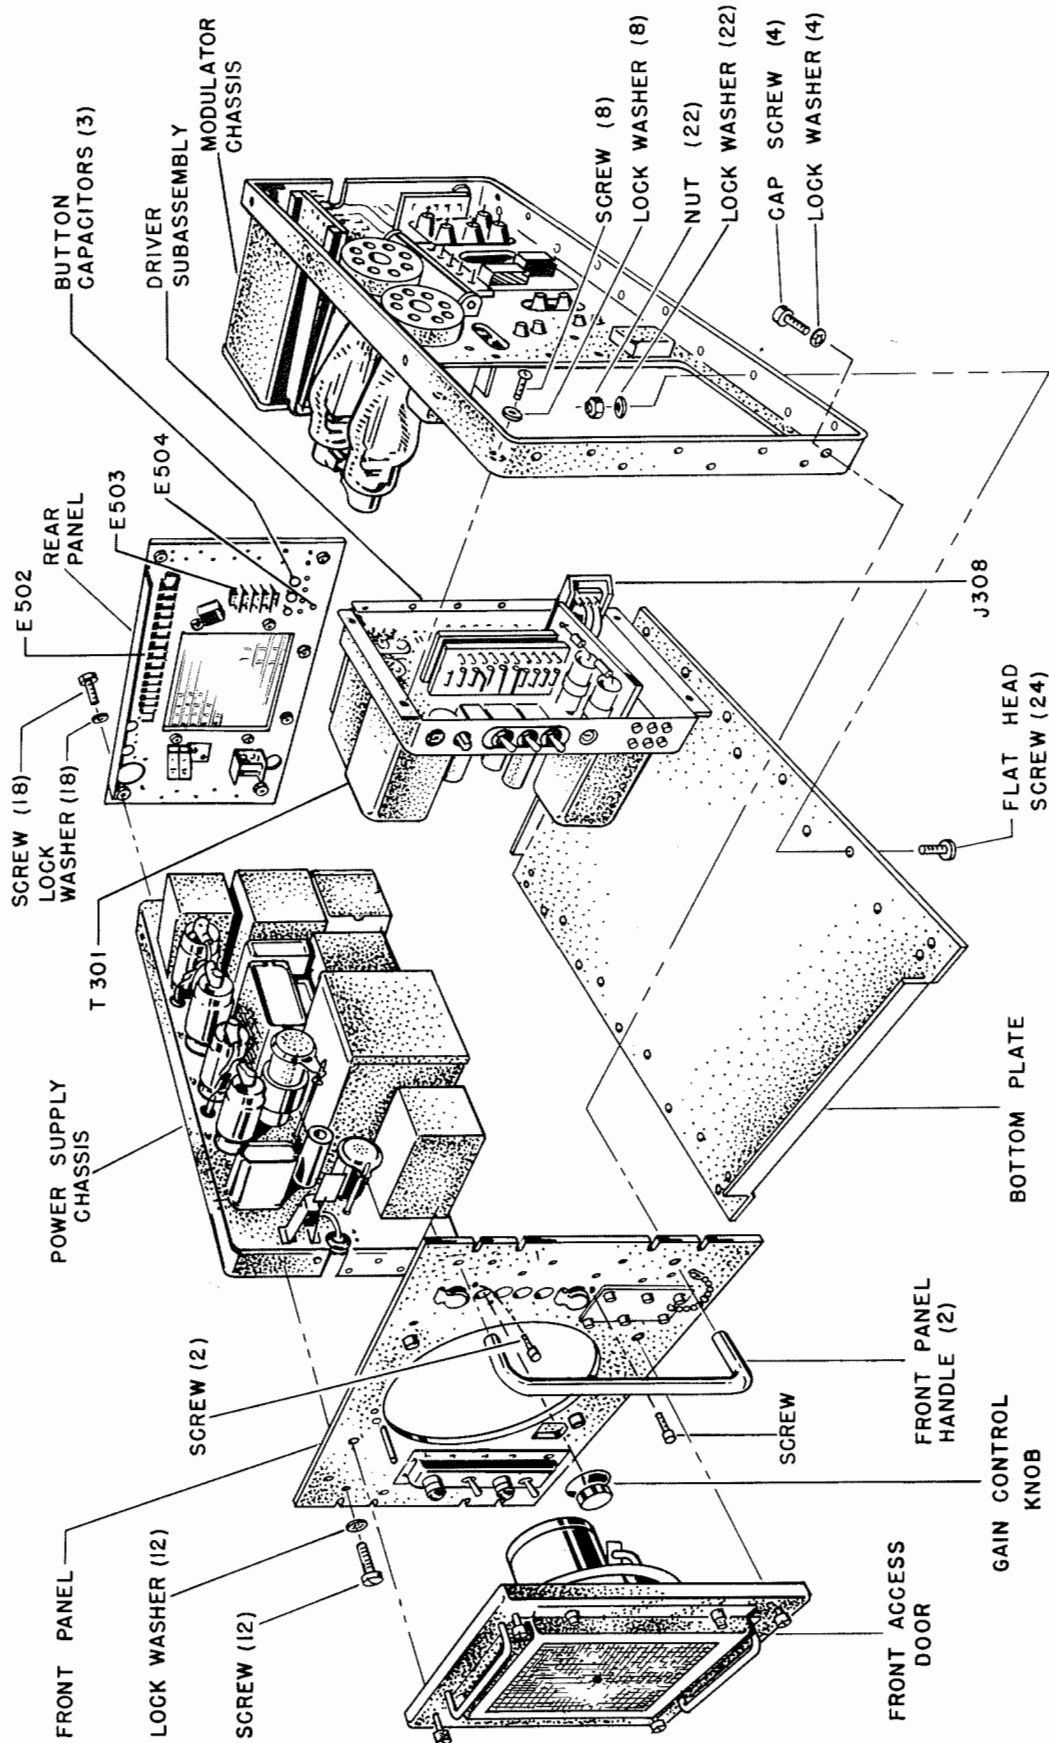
Modulator-Power Supply, Removal of Assemblies and Subassemblies
